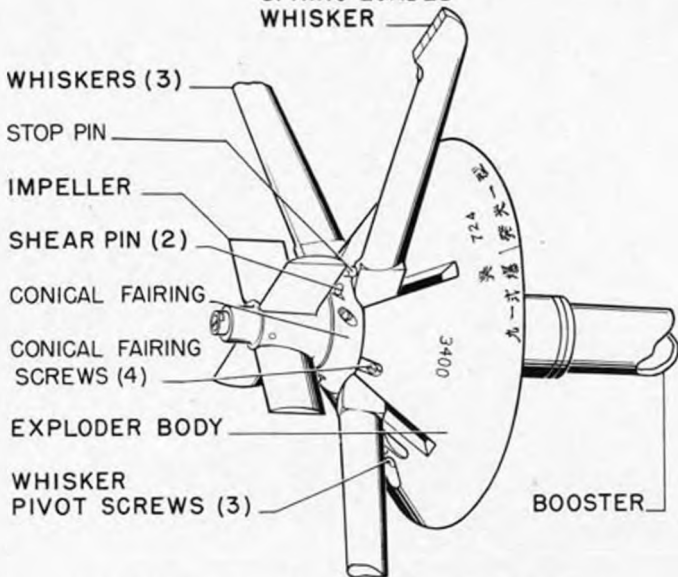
Type 91, Model 1 Exploder, Elevation
